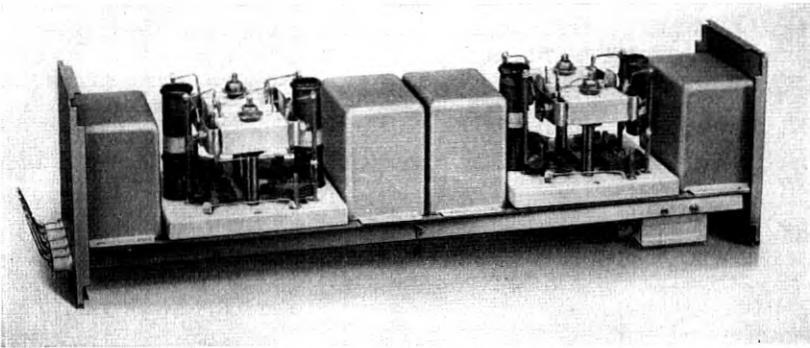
The filter parts are assembled and wired on a chassis which is slid as a unit inside the filter container.
